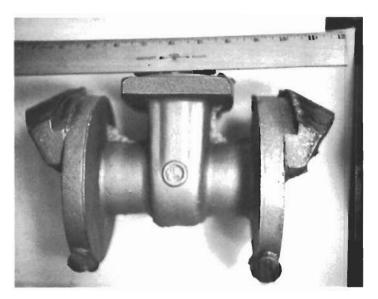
Mold Half and Core Halves for Two Inch Gate Valve Casting
